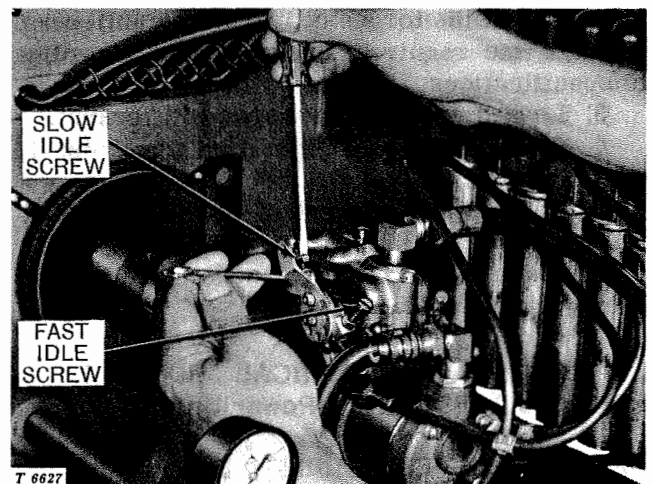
Fast and Slow Idle Adjusting Screws
